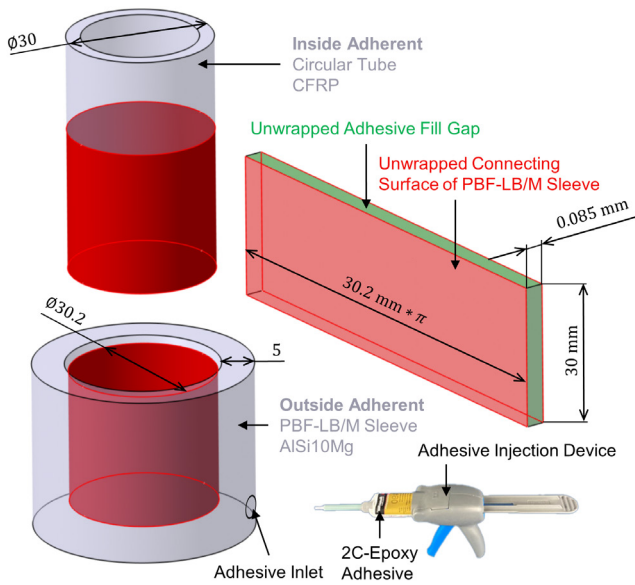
Circular adhesive SLJ considered for demonstrating the adhesive application by injection into inner channels
